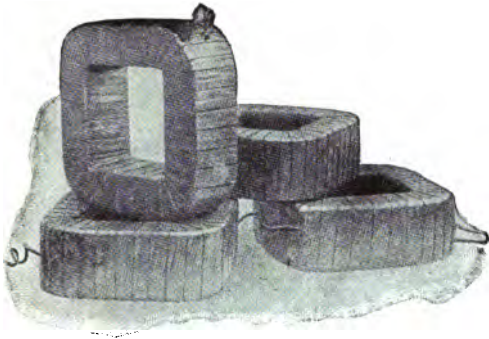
Field Coils taped ready to place on Magnet Cores.
